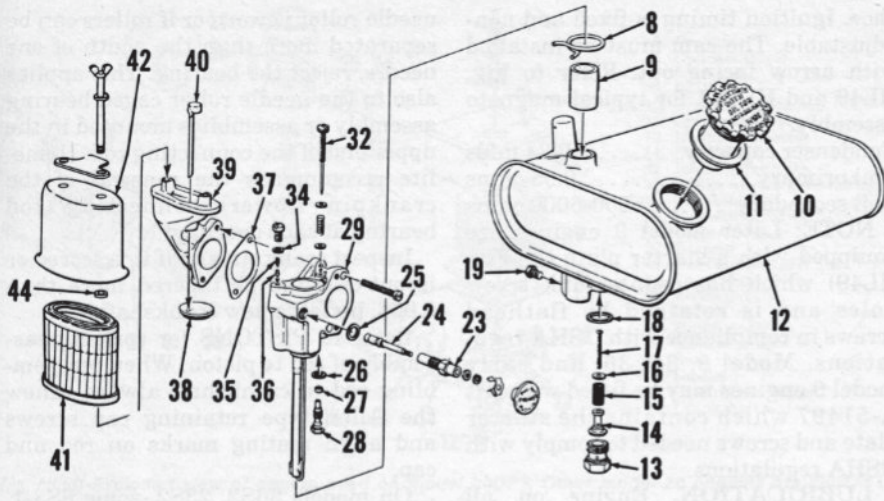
Exploded view of fuel system on models equipped with Homelite carburetor. Refer to Fig. HL44 for cross-sectional views of carburetor assembly. Fuel tank is pressurized to force fuel upward into carburetor.
